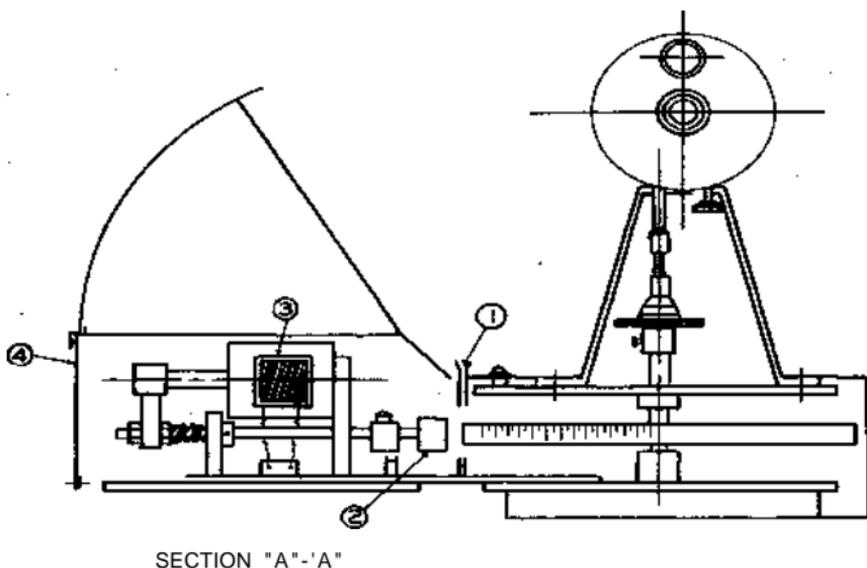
1, card holder; 2, printing hammer; 3, solenoid ; 4, cover.
